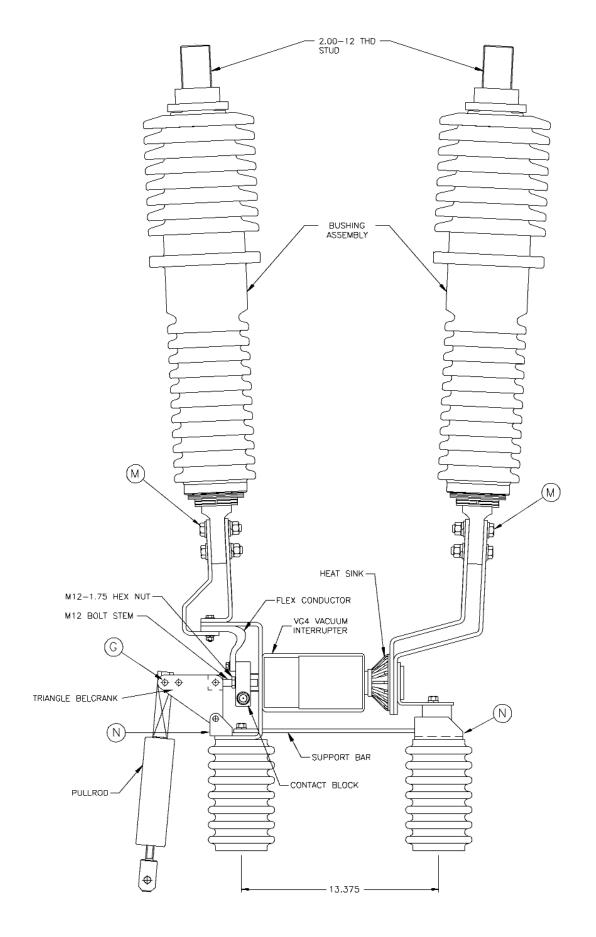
Interrupter Assembly 15.5 kV, 2000 A
